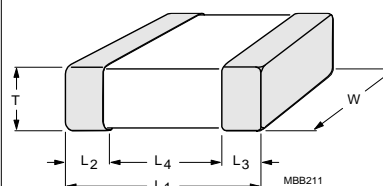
Surface mounted multilayer ceramic capacitor dimension
